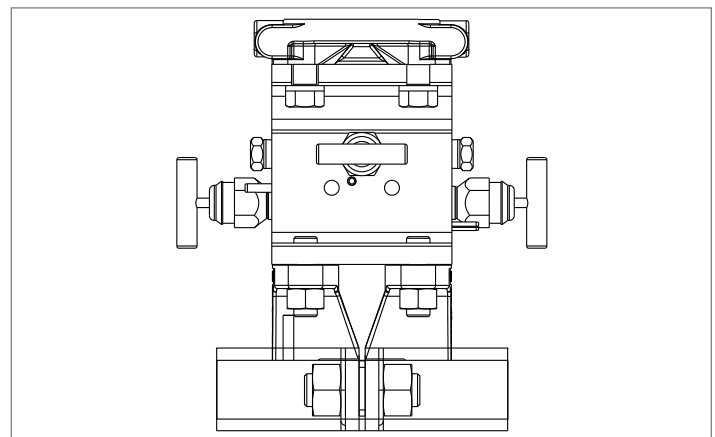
TEK-DP 1610D with 3-Valve Manifold Top View
